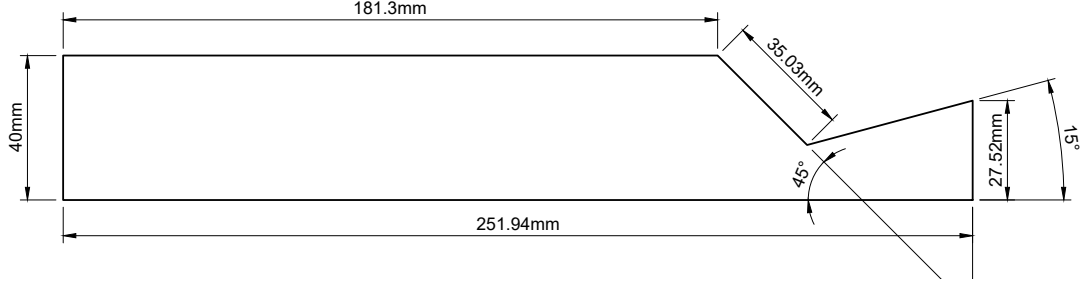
Aphlex 1B drawing with a conical nozzle and given dimensions.
